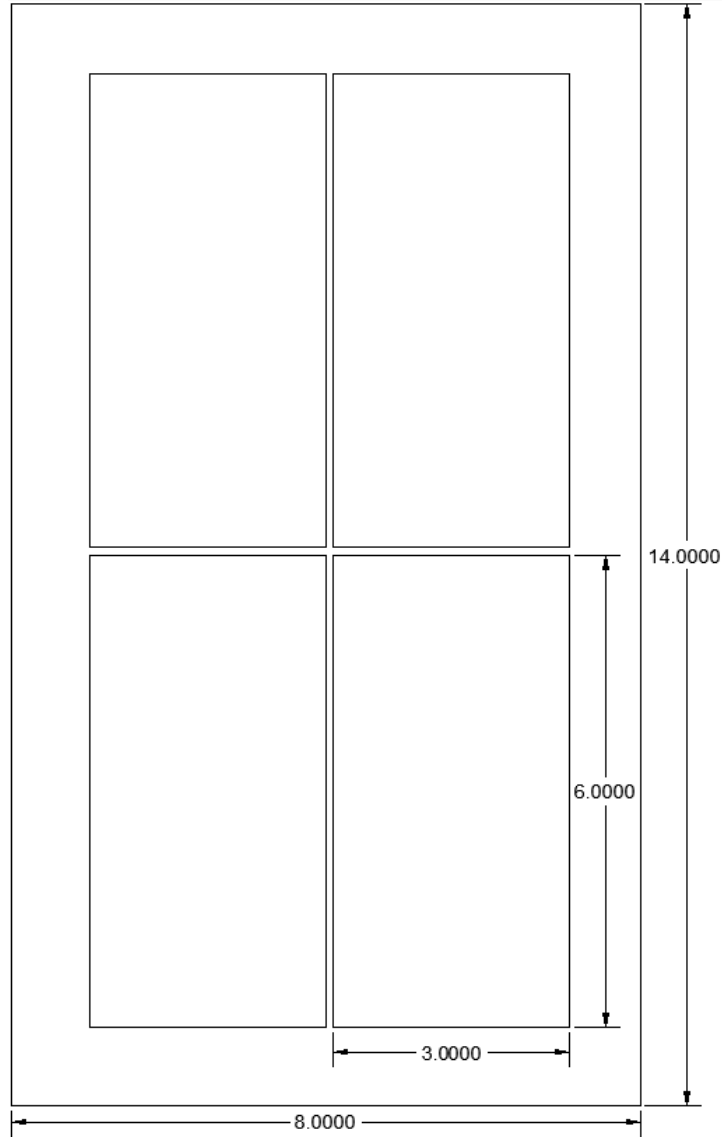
AutoCAD drawing of the 8"x14" plate for waterjet cutting
